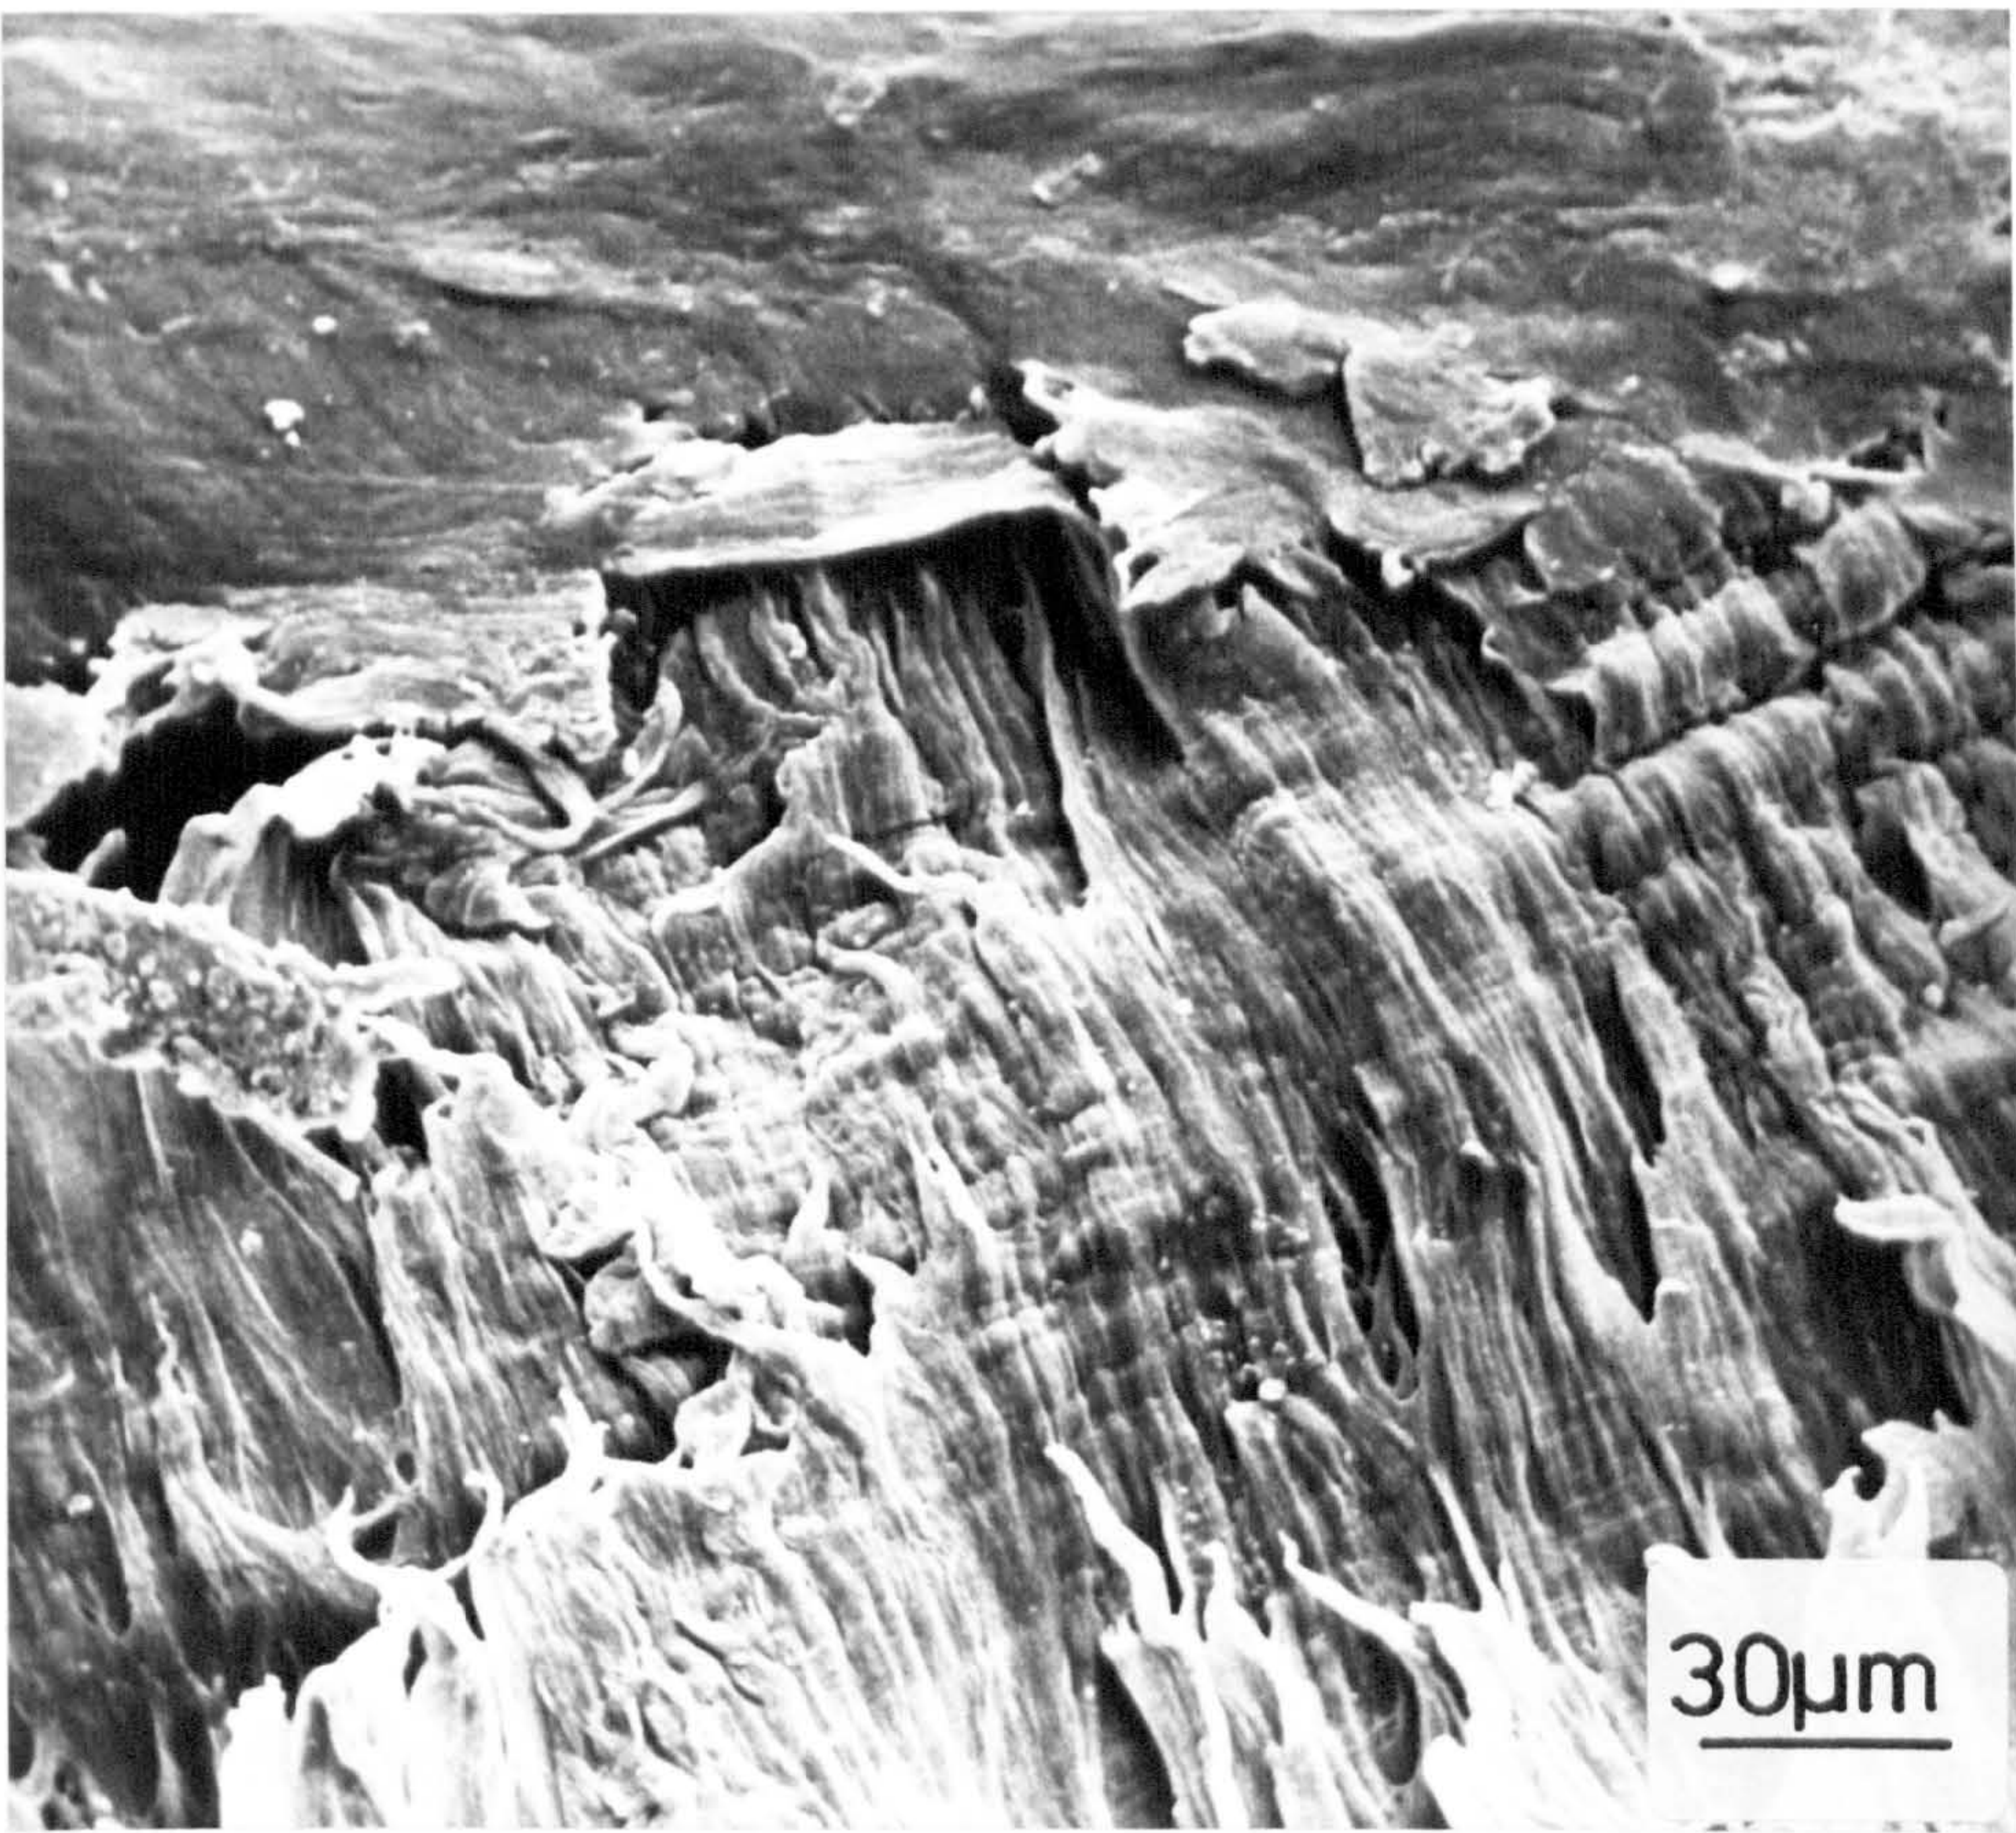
Tearing and macroductility in the final progress of an HDPE pipe fatigue fracture.
